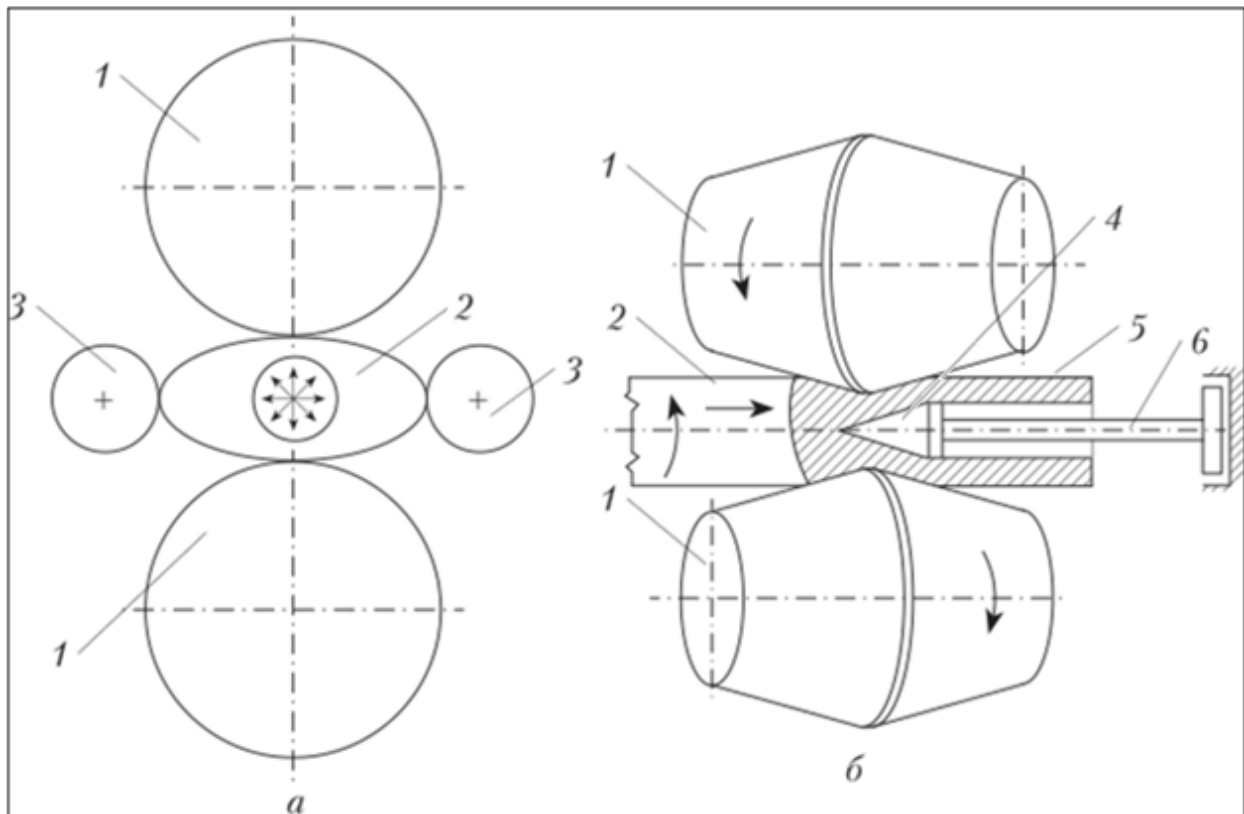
Transverse screw rolling of pipe billets (sleeves)
